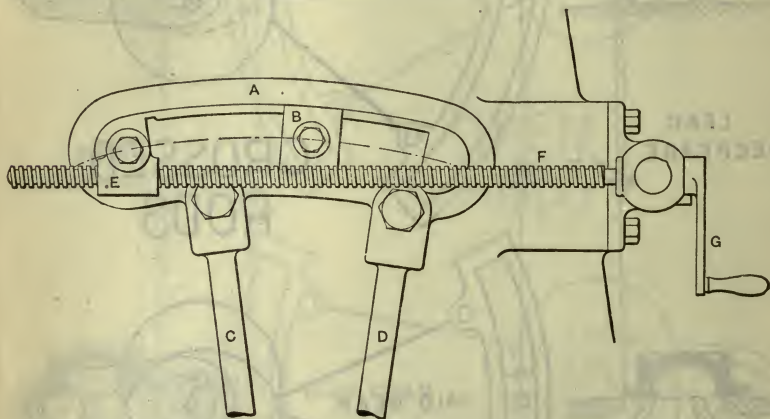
Reeves link motion adjustable cut off for engine driving centrifugal pumps, fans, etc. The cut off may be varied while the engine is in motion. The parts are: A, link; B, link block; C, D, eccentric rods; E, adjusting block; F, adjusting screw; G, adjusting crank.
